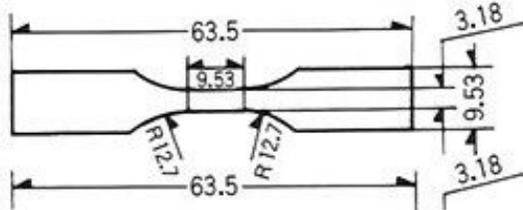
Dog bone specimen miniature version per ASTM D-18822-L.
